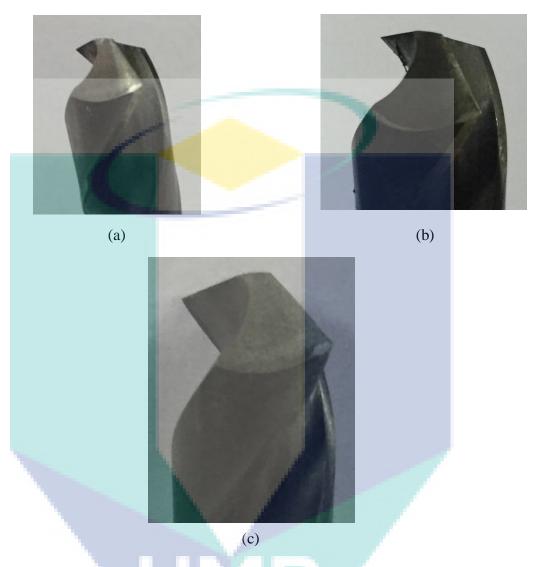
The drill cutting tool conditions after the machining process where (a) is for 10.00 mm, (b) 13.00 mm and (c) 14.50 mm in diameter.
